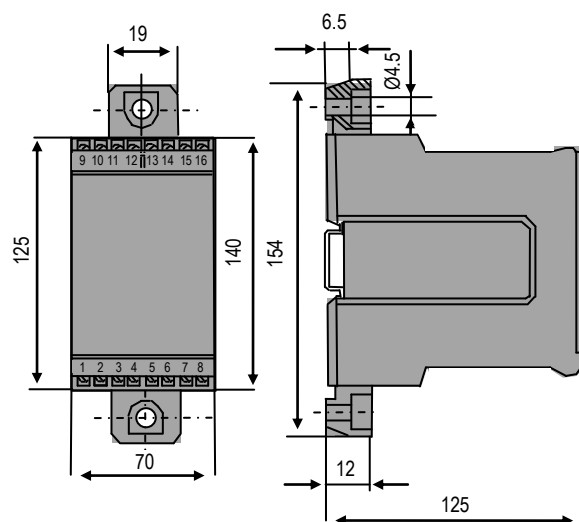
RISH Ducer P11 in housing E16 with the screw hole brackets pulled out for wall mounting.
